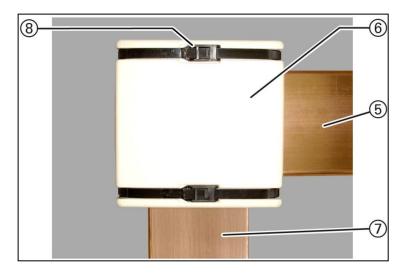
Assignment of assembly parts for insulating shells; for example: end panel
